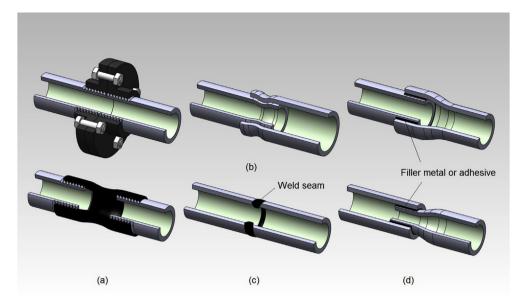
Currently available technologies for joining end-to-end tubing: (a) fastened joints with flanges and bulkhead unions, (b) crimped joints, (c) welded joints and (d) brazed or adhesive bonded joints.
